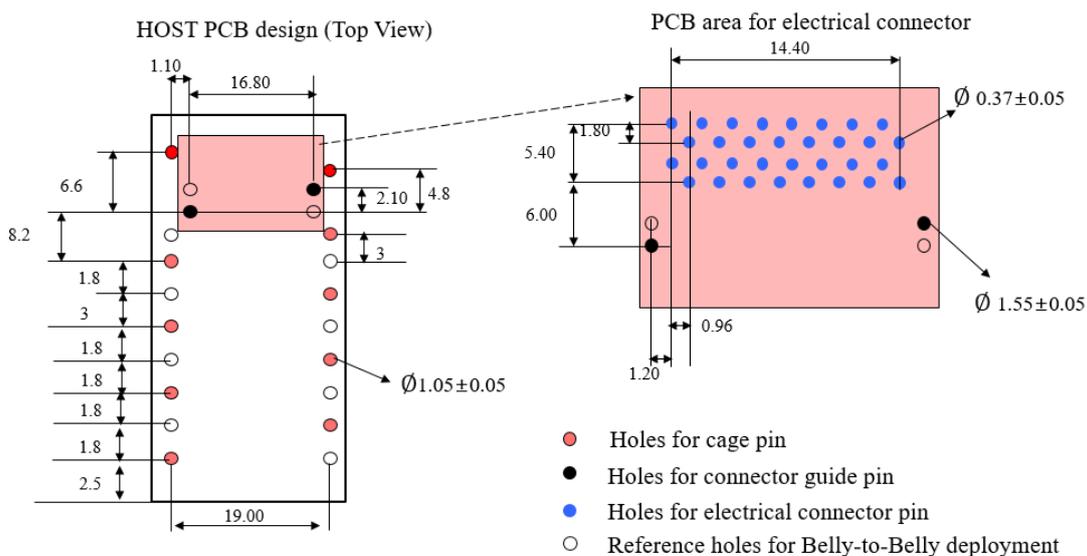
Host PCB design layout for PELS belly-to-belly deployment
